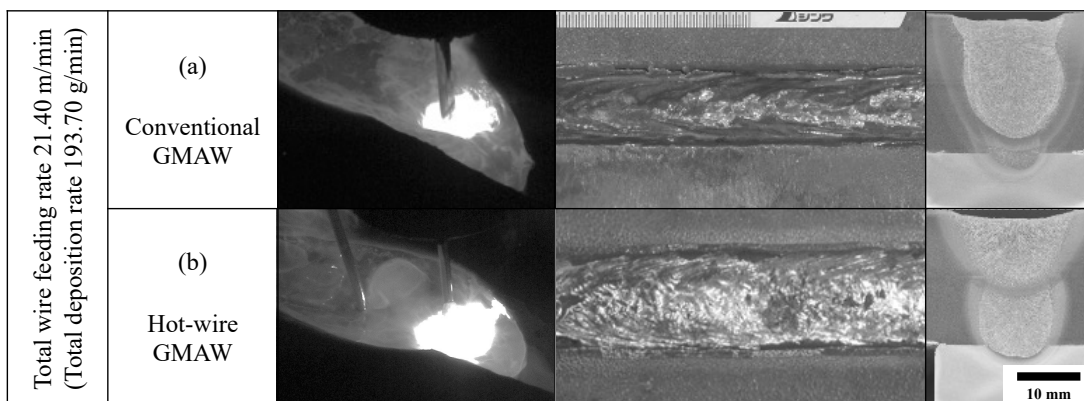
Arc observation, bead appearance, and weld profile:
